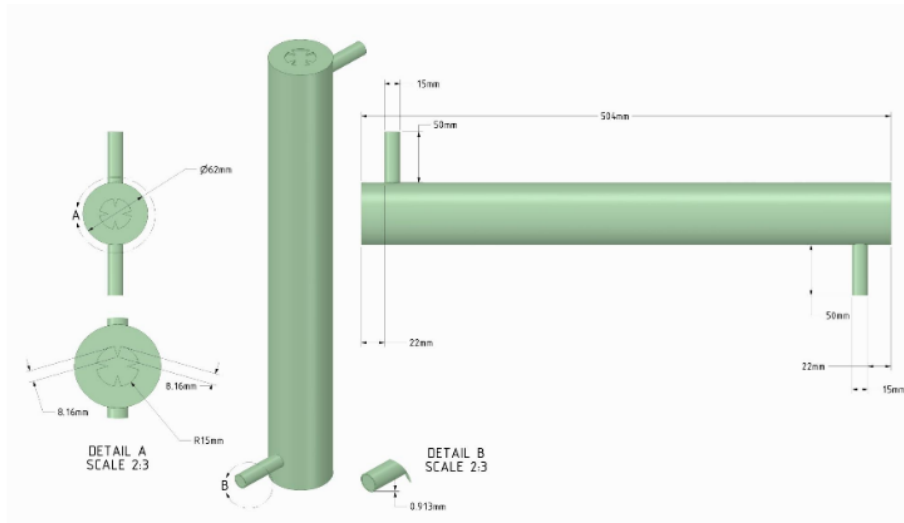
CAD drawing of tube-in-tube heat exchanger.
